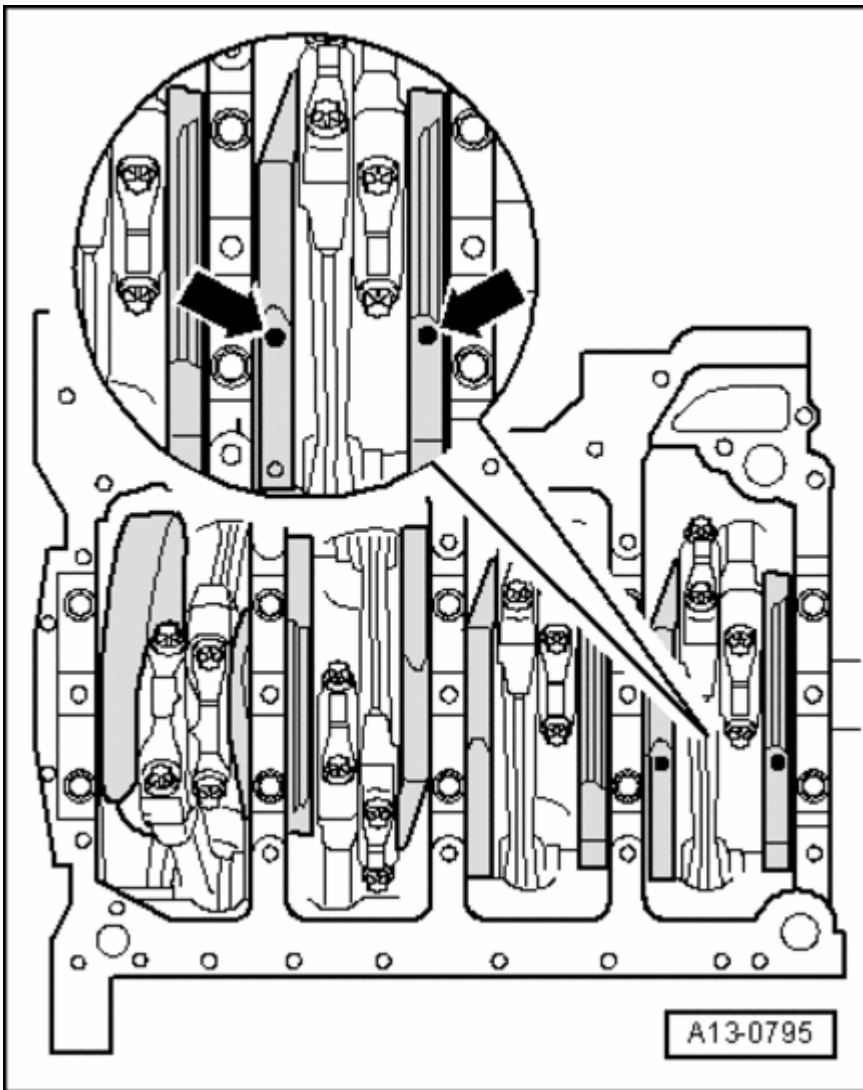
Allocation Of Crankshaft Bearing Shells For Bearing Cap
